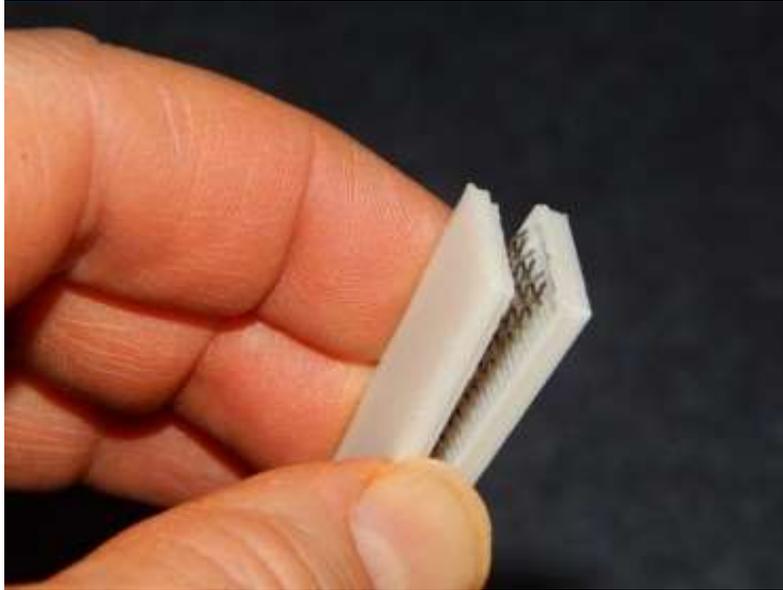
Interlocking 3D printed thin skins with stainless steel mesh inside.
